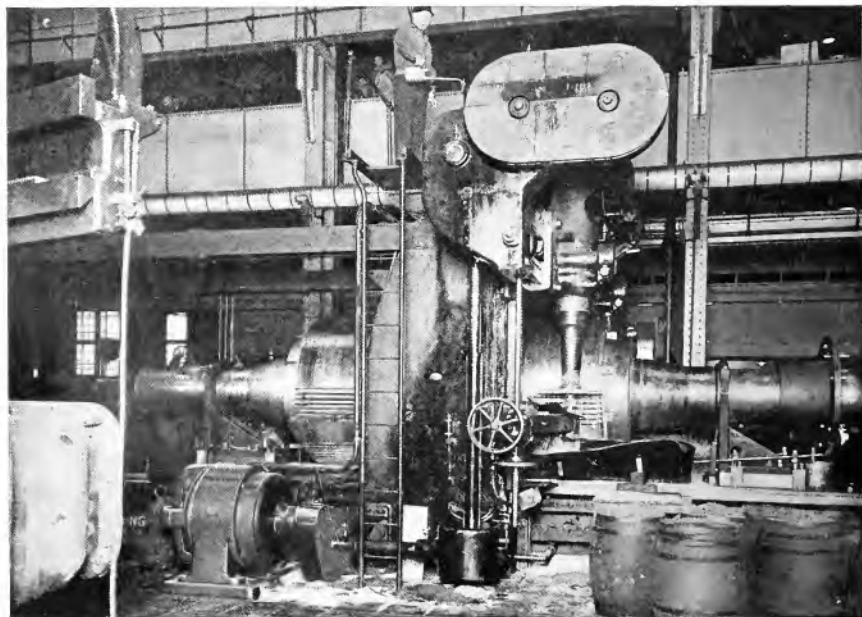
Machining the Field Winding Slots in the Solid Forged Rotor of a Turbine Generator
